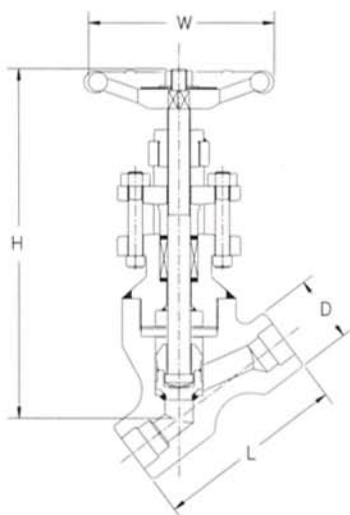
S-FS3 - WB - Y Class 800 (Socket Weld)
